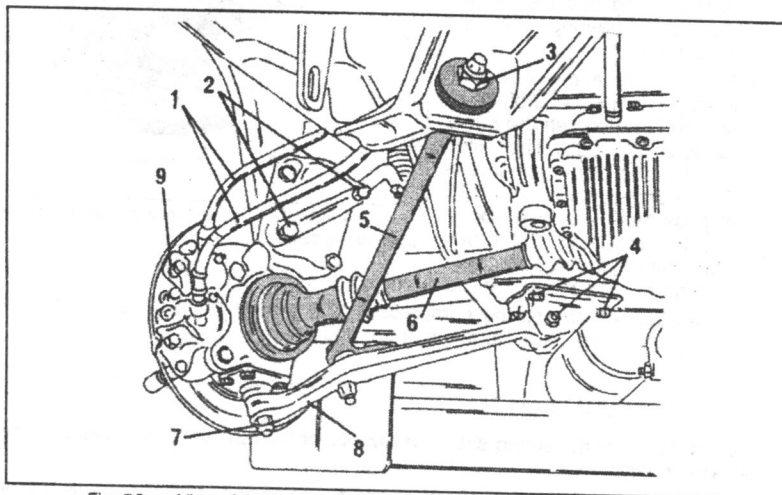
View of the front suspension on one side with the wheel removed.
